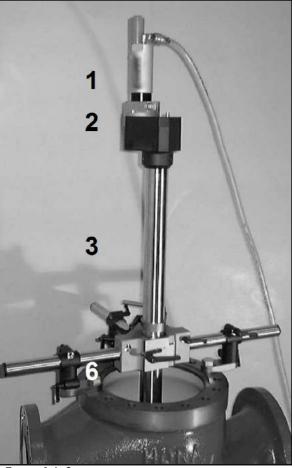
COMPONENTS WITH PNEUMATIC DRIVE MOTOR
